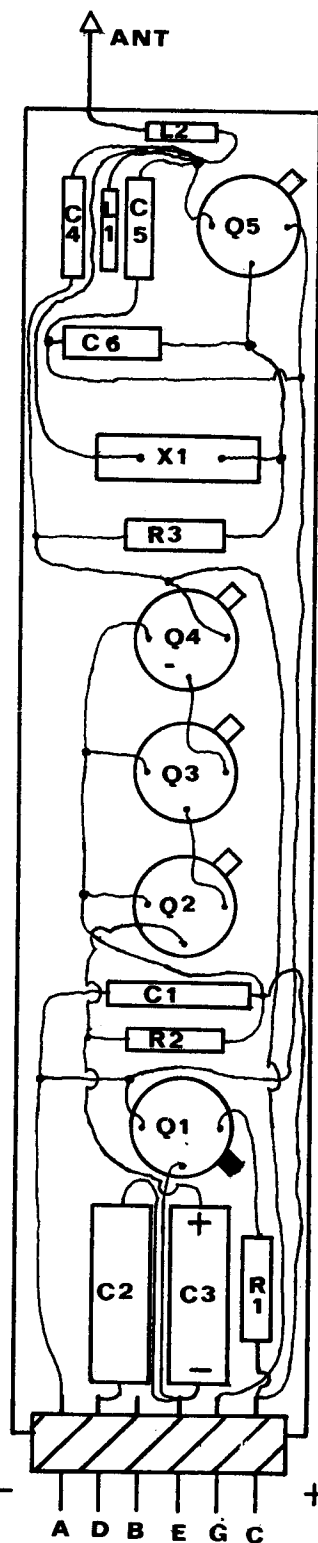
"Foxmitter-2" Wiring Diagram. View of wiring on bottom of the vector board. Note that parts are mounted on the other side of the board, and are shown here for reference only.
